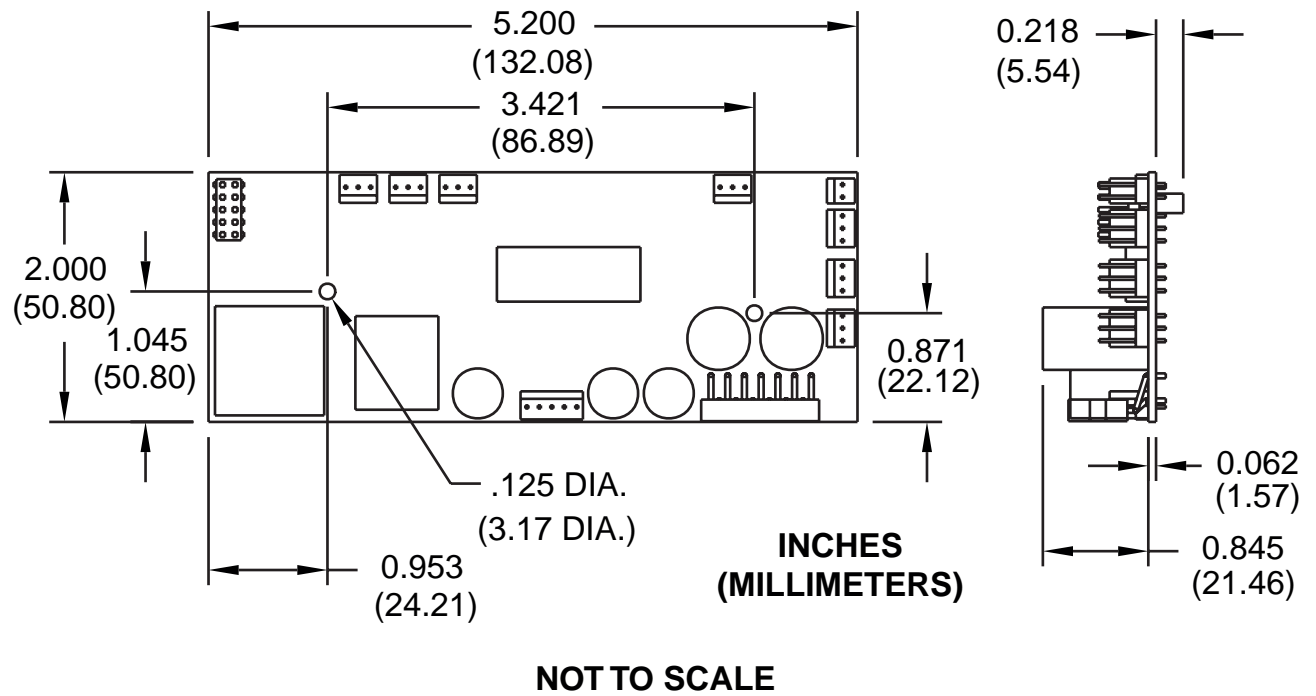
Control and Audio Receive PC Board Dimensions (Not shown to scale)
